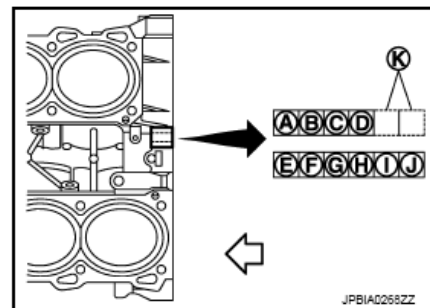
Identifying Bearing Housing Grade And Cylinder Bore Grade Numbers On Cylinder Block
